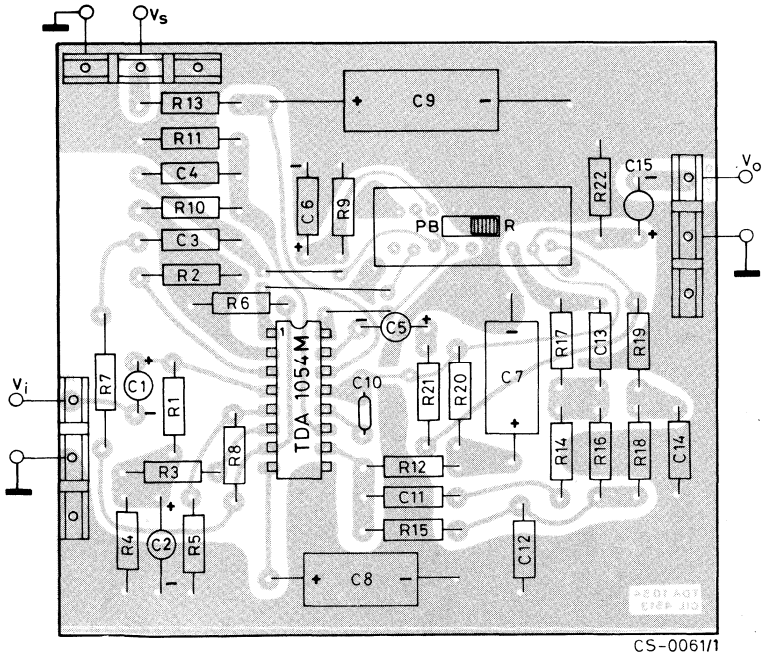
P.C. board and component layout for the circuit fig. 9 (1:1 scale)
